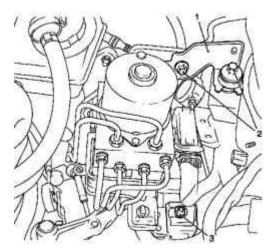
Removing the module anti-lock braking system: 1 - upper bracket, 2 - mounting screws, 3 - bottom bracket
